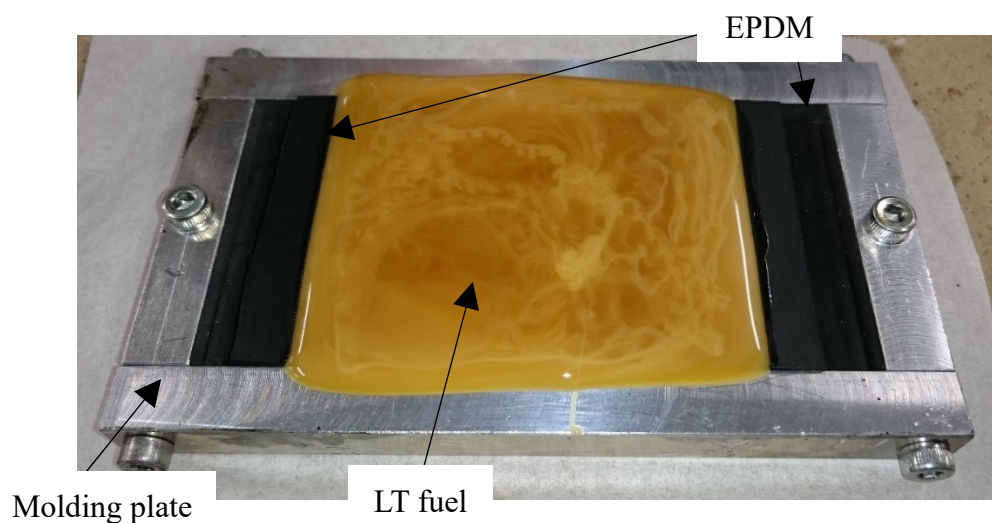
The melted LT#460 fuel after poured into the molding board and EPDM rubber.
